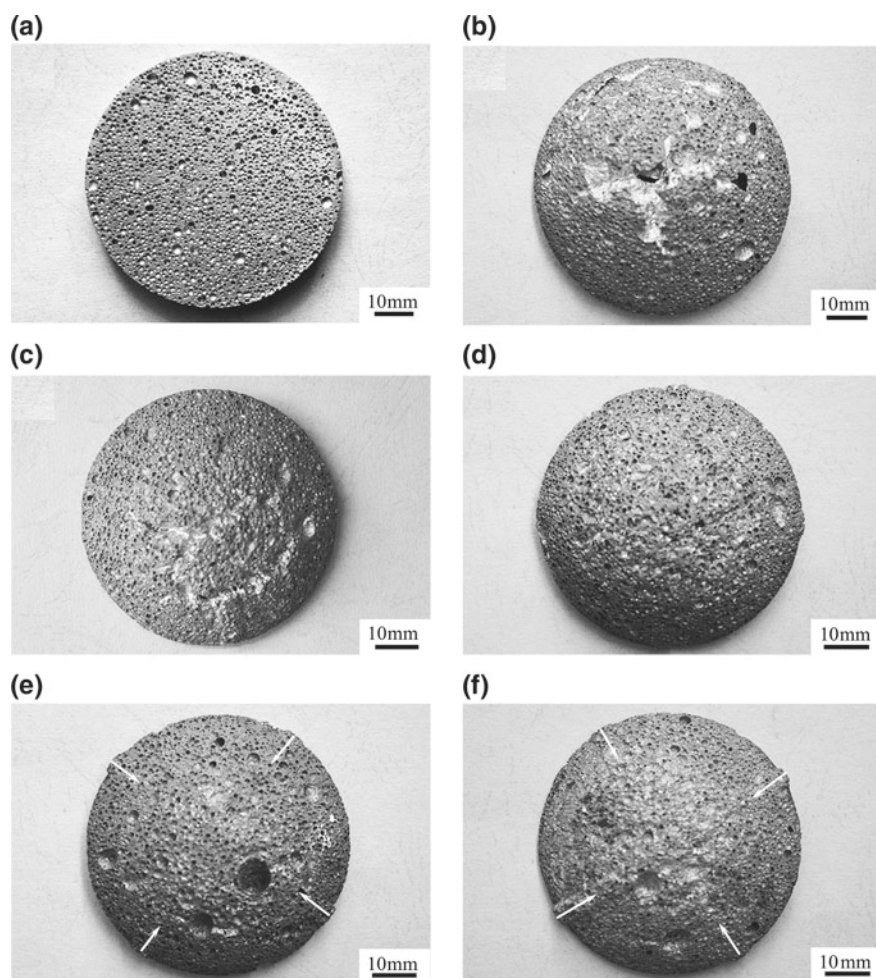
Macroscopic morphology of initial and deformed CAFs. a Initial CAF; b 615 °C; c 625 °C; d 635 °C; e 645 °C; f 655 °C
